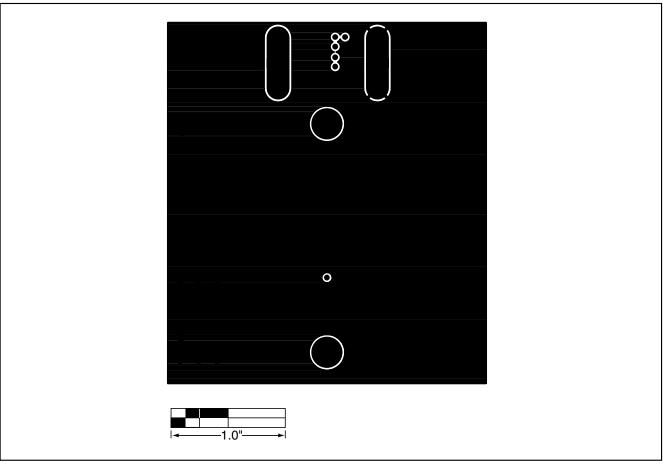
MAX3785 EV Kit PC Board Layout—Ground Plane
